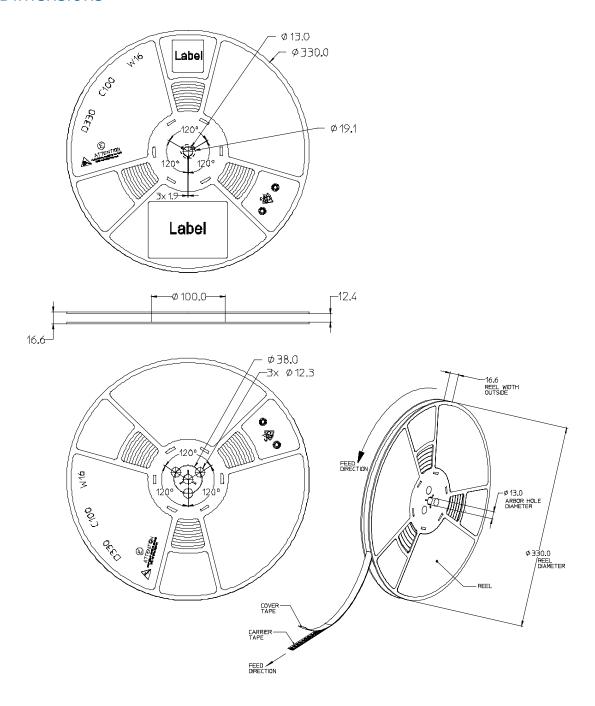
Reel dimensions for LUXEON Rebel Color Line.
